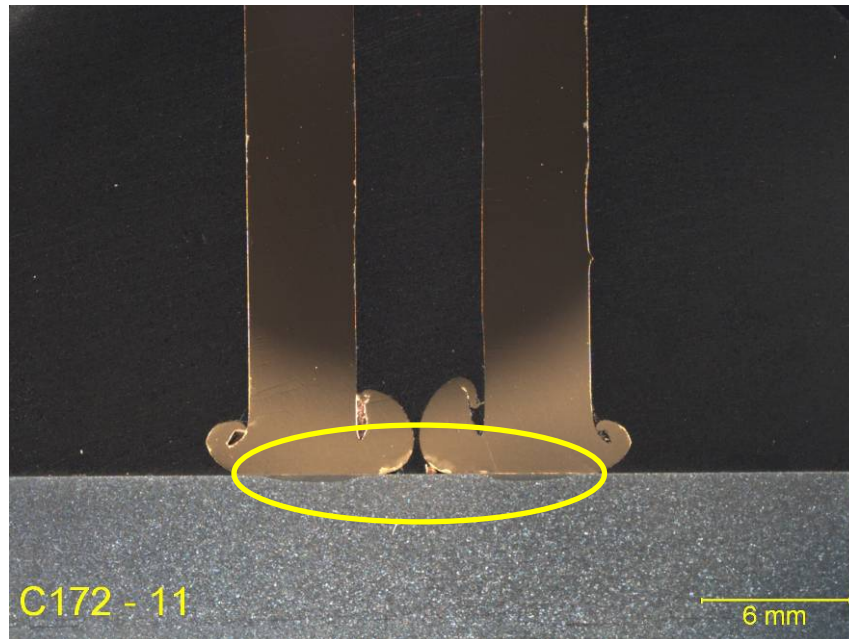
Cross Section of C172 Weld 11 Showing Small Areas of Martensite below Weld Joint
